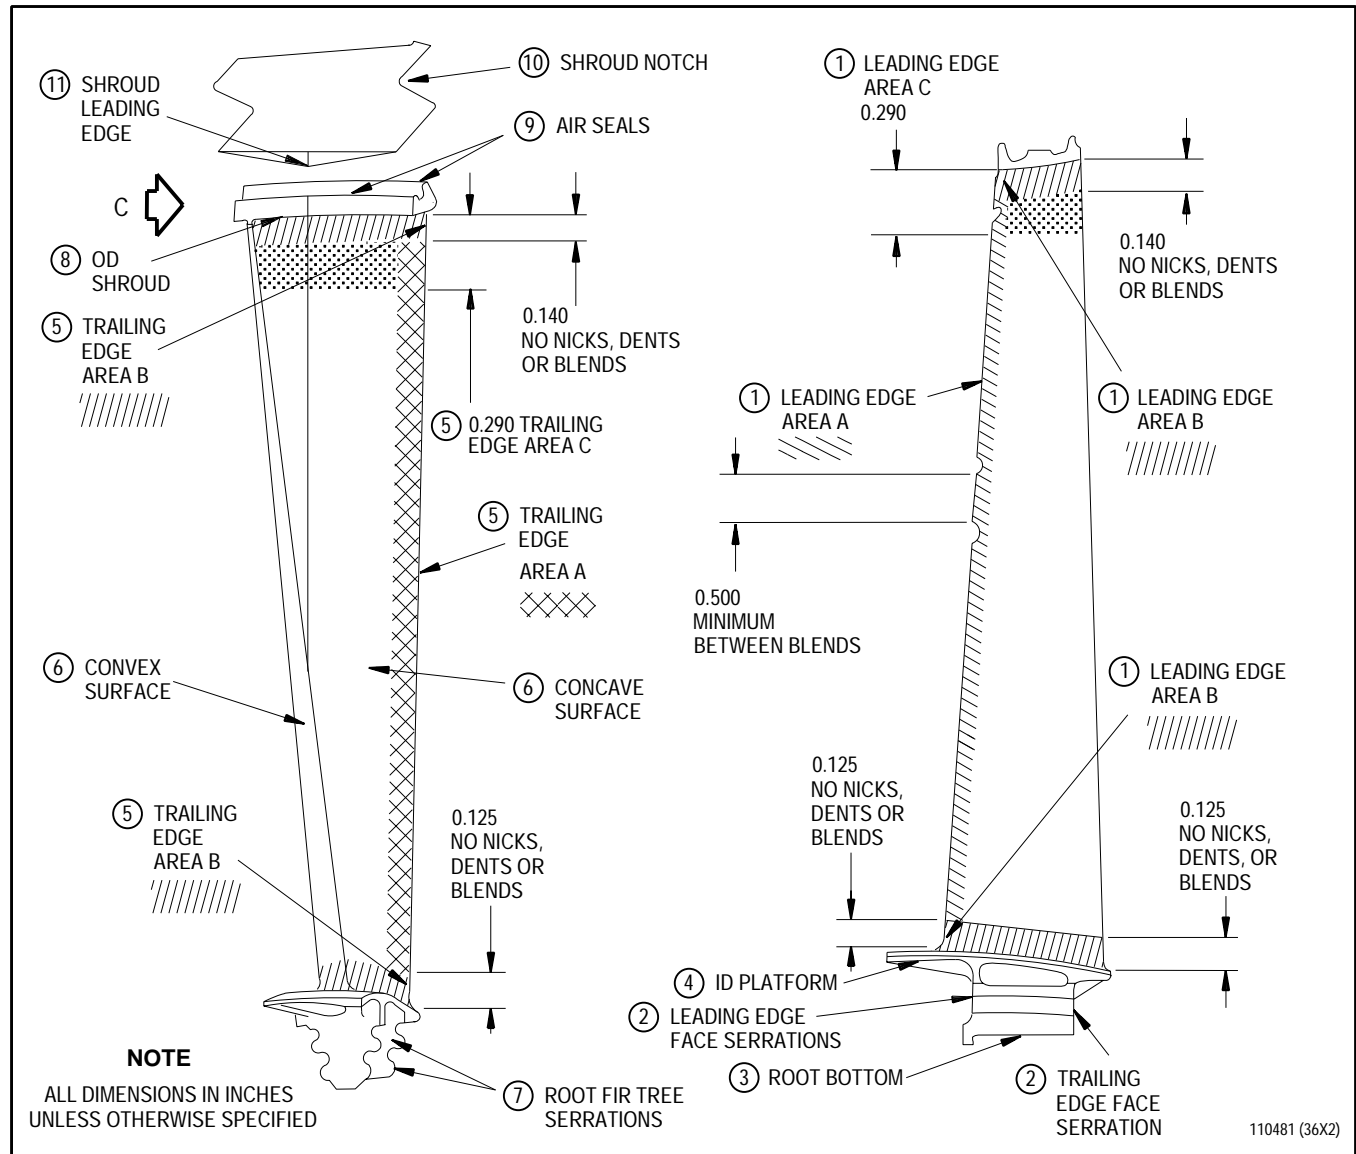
Third Stage Turbine Rotor Blades - Inspection (Sheet 1 of 2)
